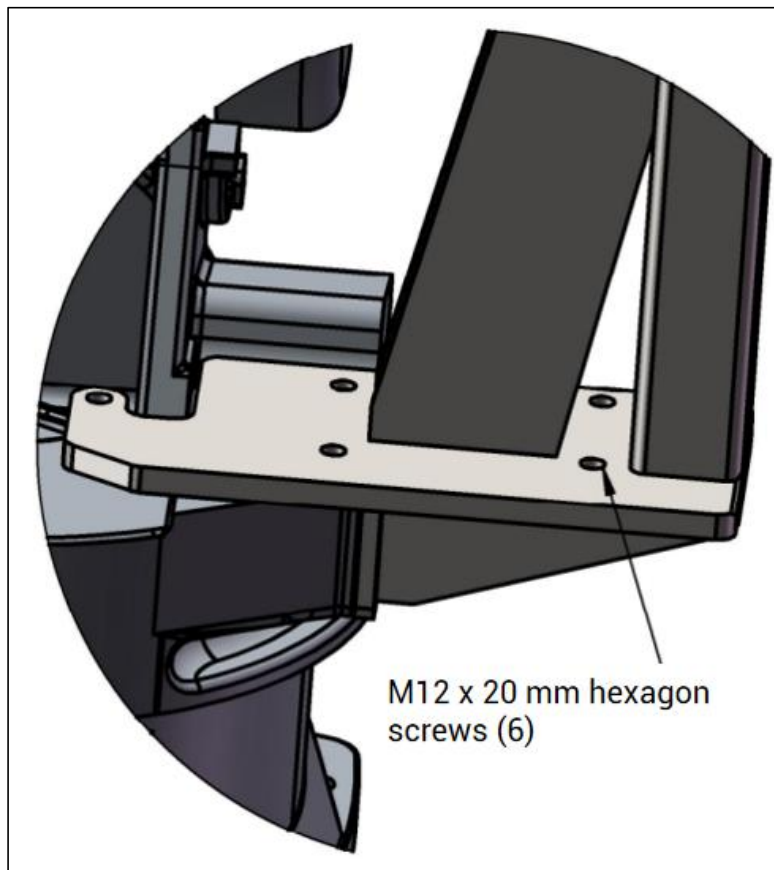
Connect the welded I-beam to the bracket base
